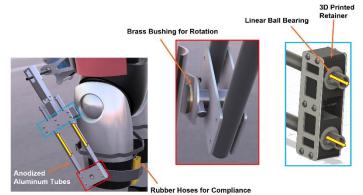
HIP MECHANICS CAD SCHEMATIC
